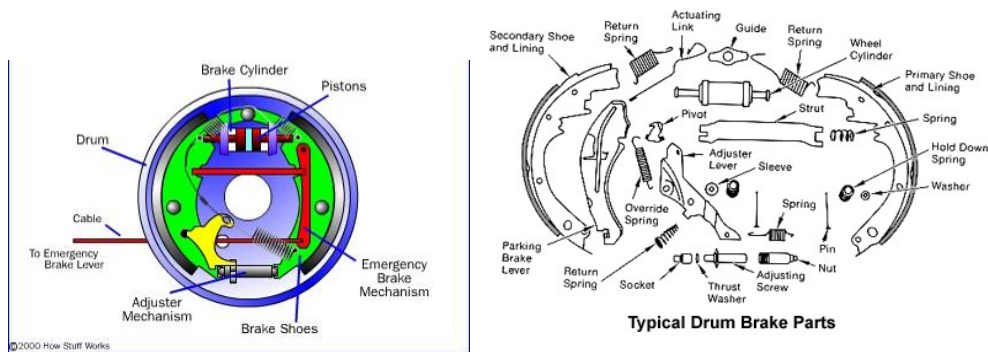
Drum brake (source: howstuffworks, <http://www.familycar.com/brakes.htm>).
